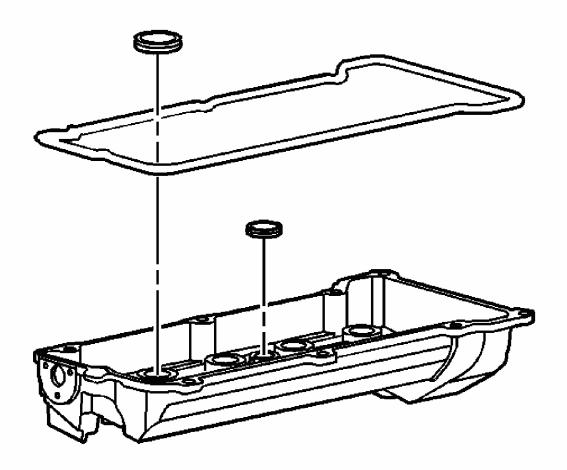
Identifying Left Camshaft Cover Gasket & Seals Courtesy of GENERAL MOTORS CORP.
